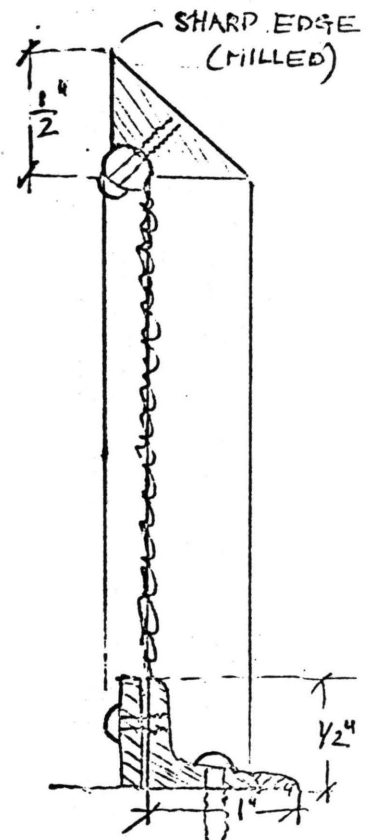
C CONSTRUCTION DETAILS (NOT TO SCALE)
